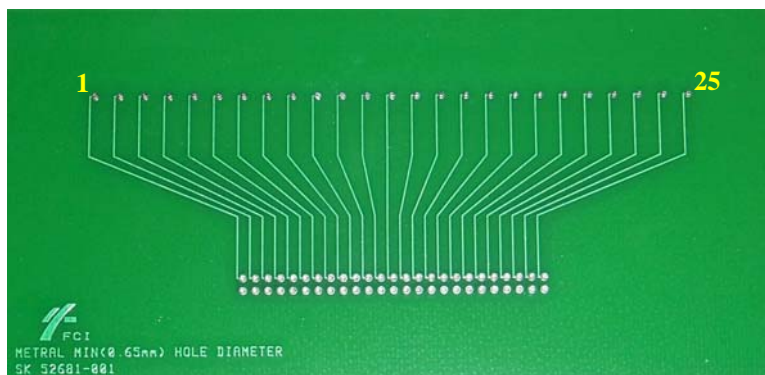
Example of Printed Wiring Board for Testing, Front View, Showing Position Numbering
